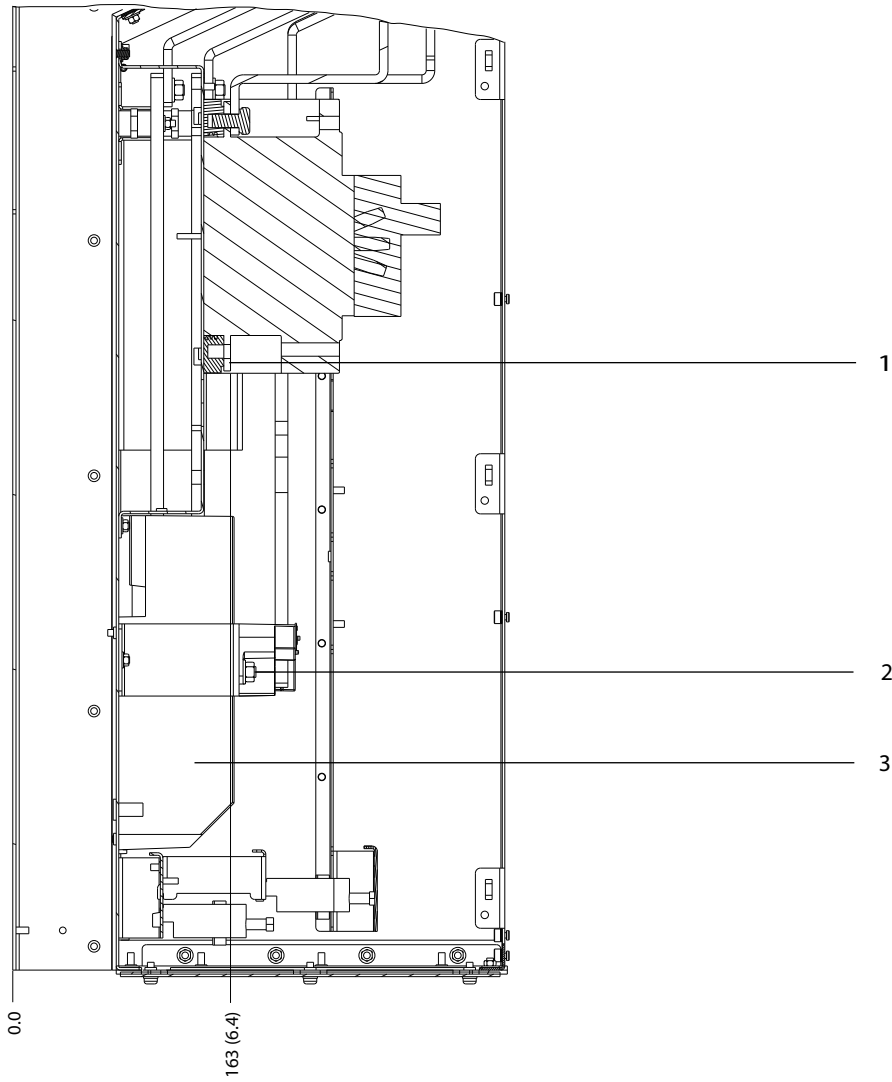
D6h Terminal Dimensions with Contactor and Disconnect Options (Side Views)
